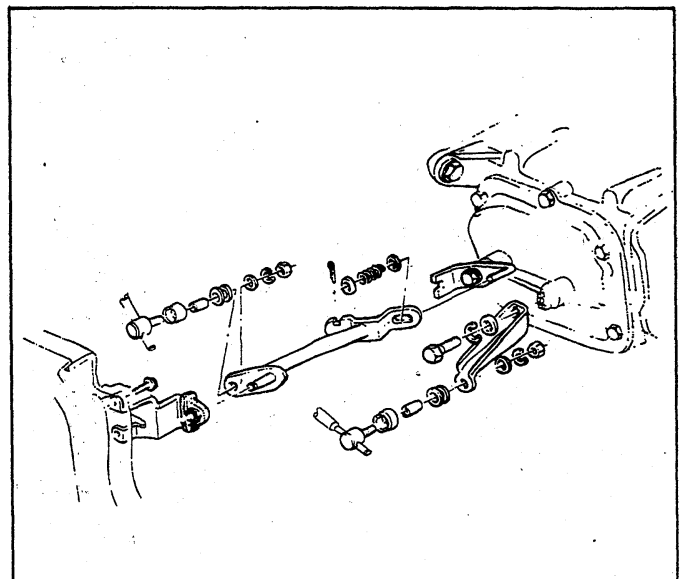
A - Chevrolet 2-3 Shift Lever Cordon Shaft
